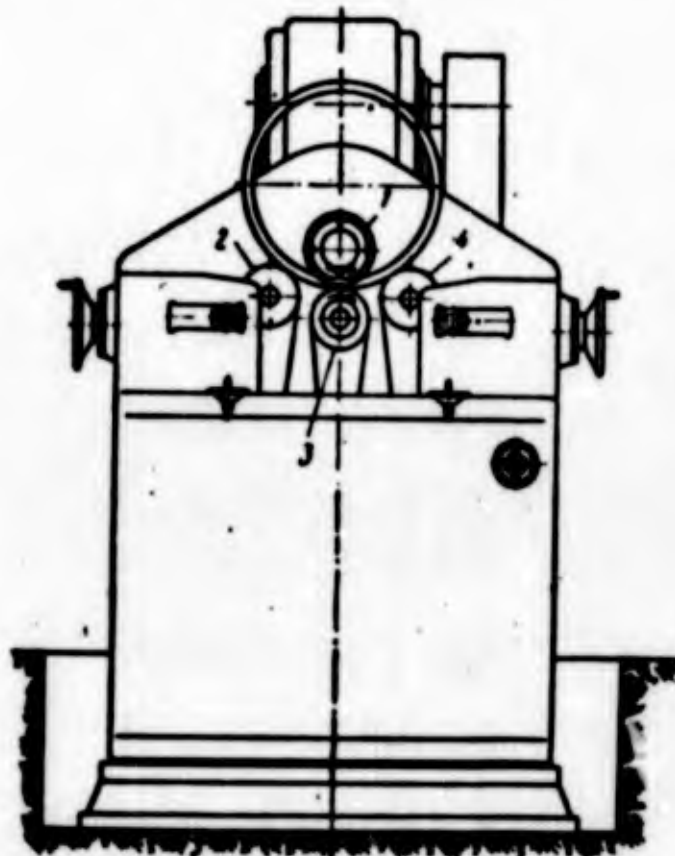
Bending of a profiled annular blank on machine PG-4.
